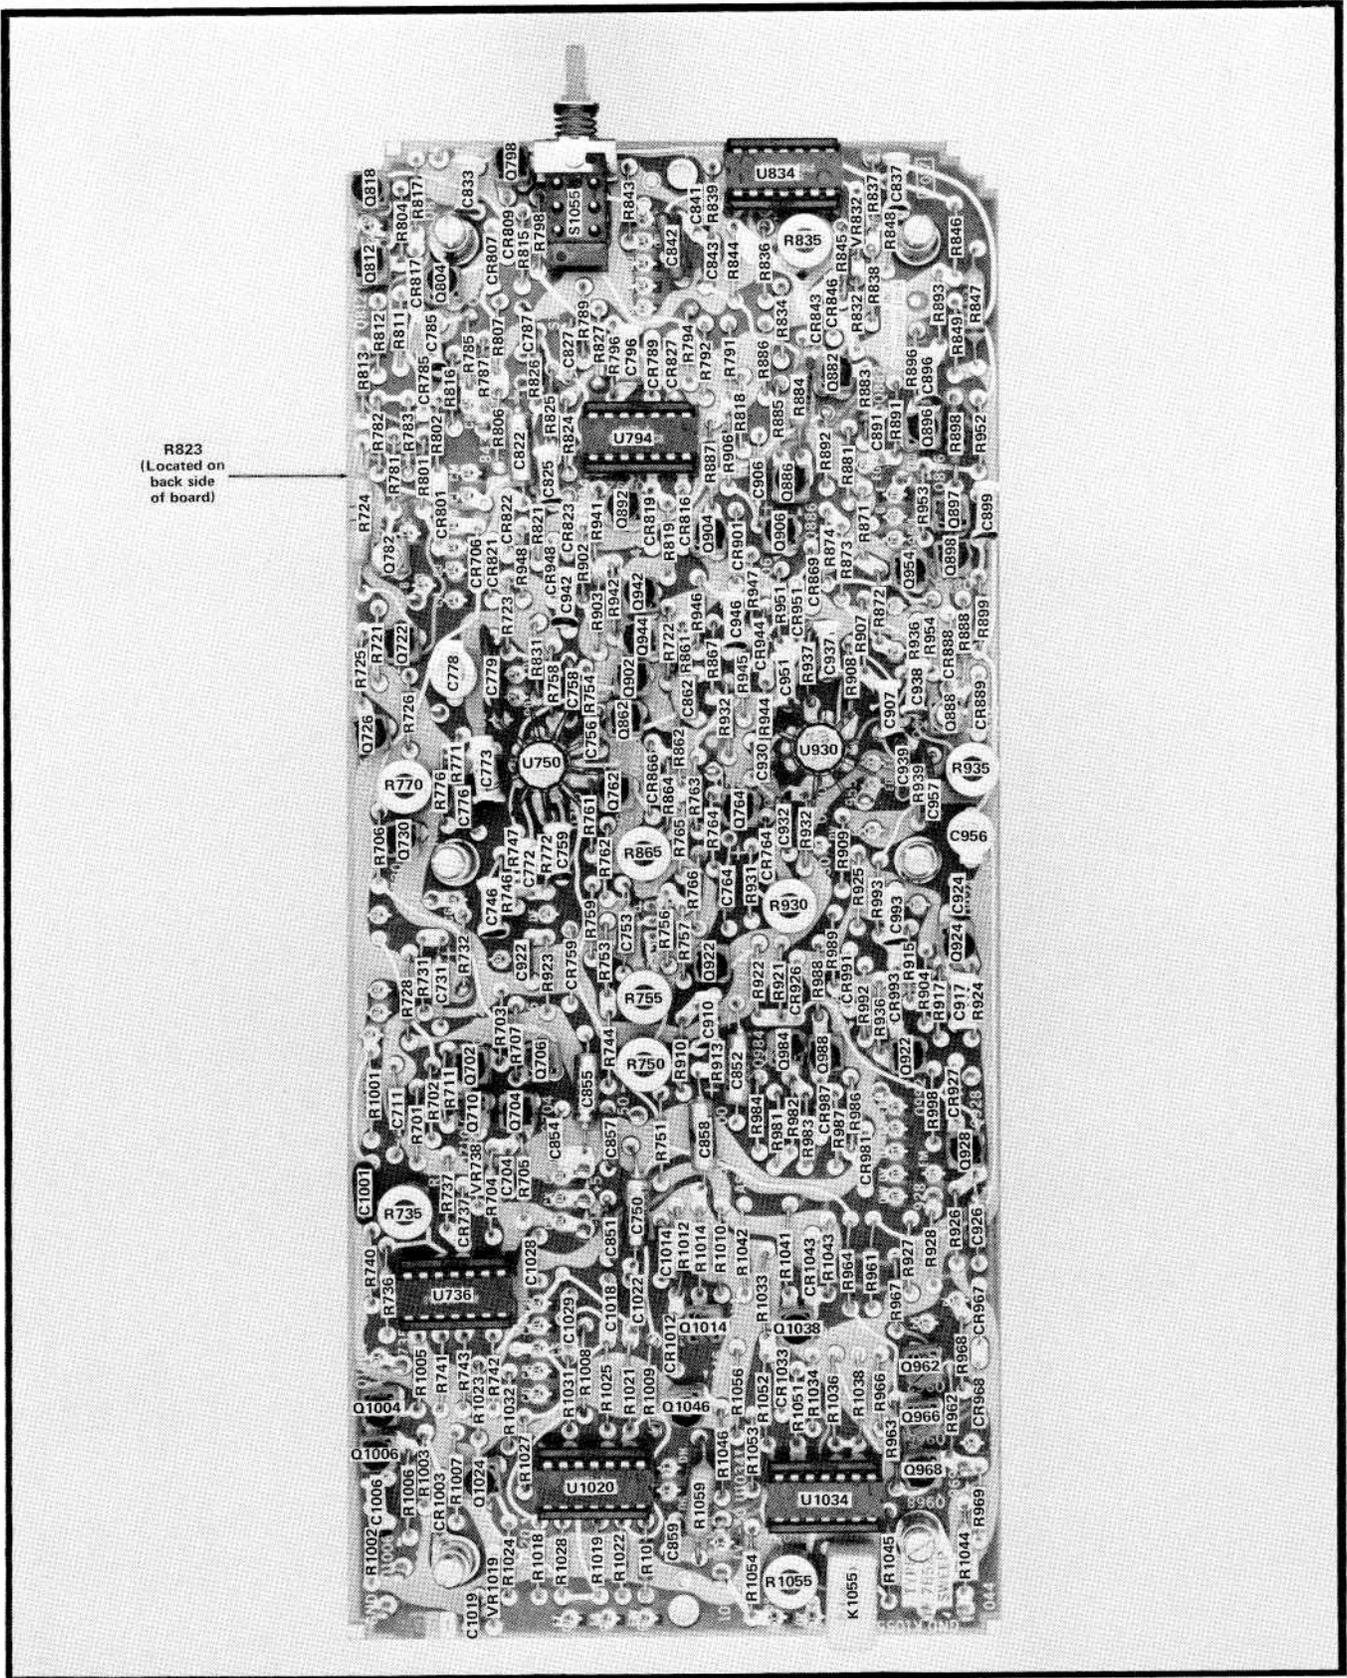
7B52 SWEEP BOARD showing component locations.
